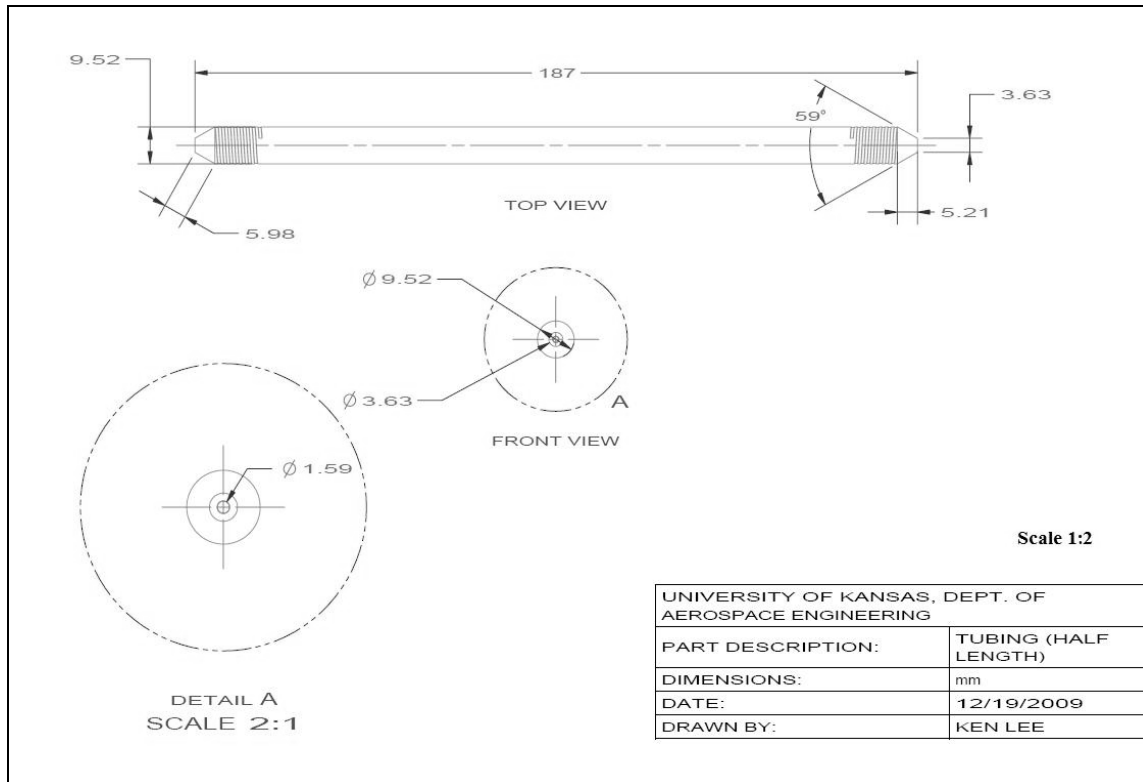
Top and Front CAD Views of the Half-Length Tubing Drafted in UG NX 6.0.
